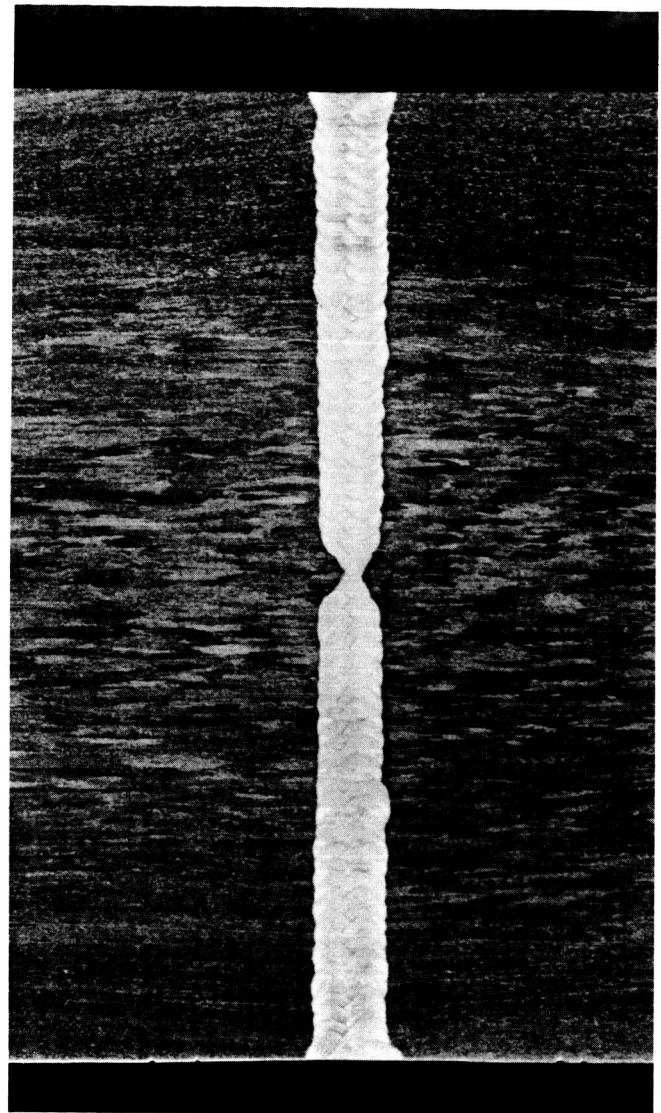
MACROSECTION OF NARROW-GAP WELD DEPOSITED IN 1-INCH-THICK 2219-T31 ALUMINUM ALLOY BY THE SINGLE-WIRE-OFFSET TECHNIQUE (Plate V-13)
